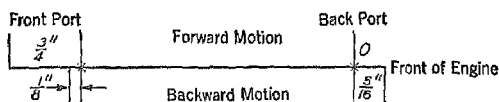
Combined Valve-Rod, Eccentric-Rod, and Eccentric-Crank Error
